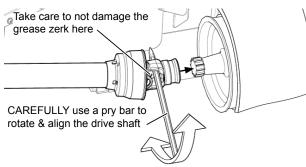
Connect Drive Shafts (both sides of feeder house)
